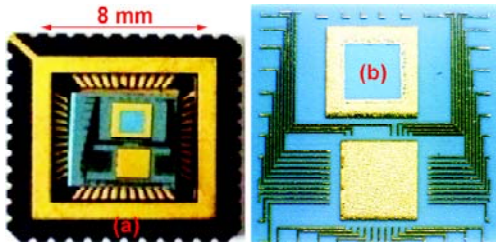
(a) Pressure sensor package using Laser ablation technique (b) Zoomed image of substrate for pressure sensor packaging (Laser micromachining on CEERI samples courtesy: M/s Laser Science Services Pvt. Ltd., Mumbai)
